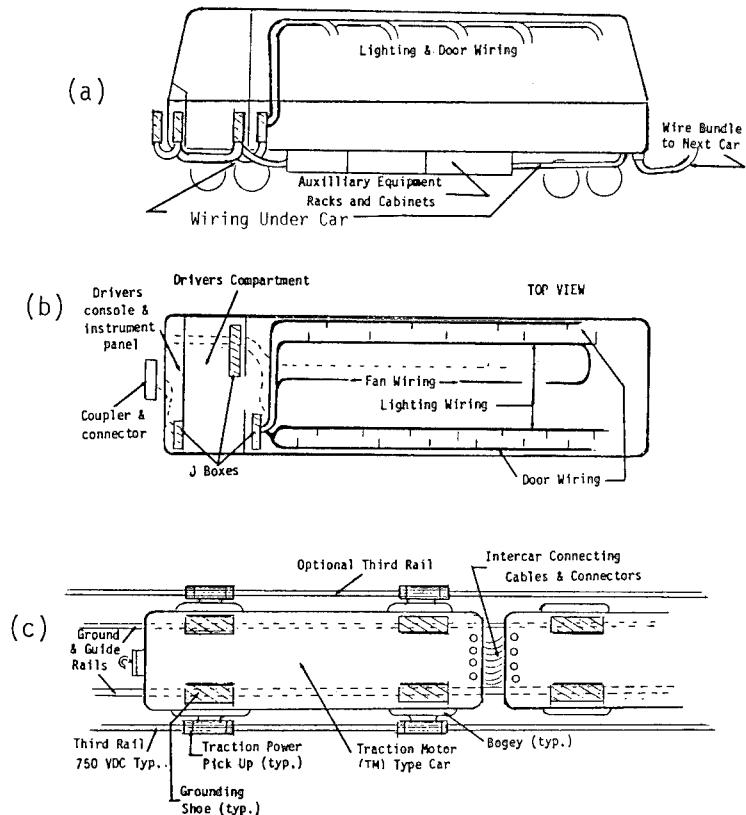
TYPICAL RAPID TRANSIT SYSTEMS WIRE AND CABLE INSTALLATION
